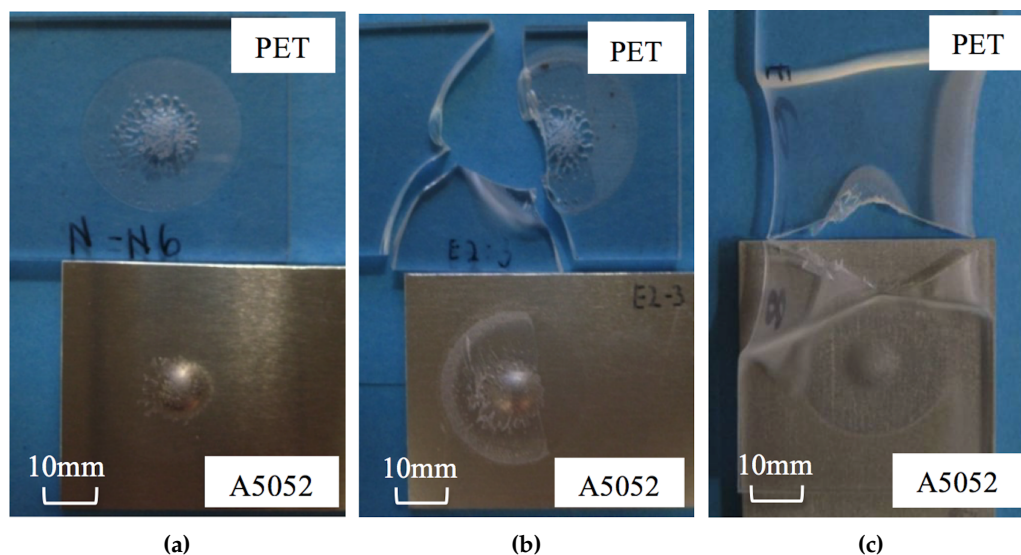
Three types of failure mode occurred in the A5052-PET joints. (a) Separation at welded interface; (b) fracture at the edge of bubbles or hollow structures; and (c) fracture at the edge of welded area after PET deformation.
